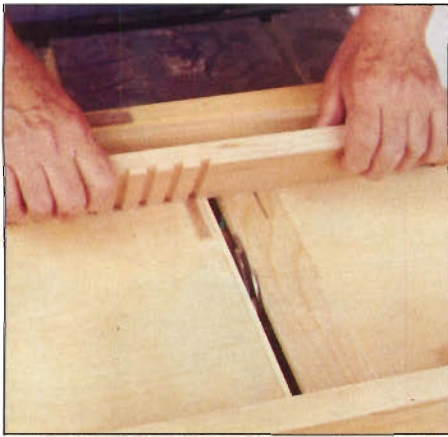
Photo G: Attach key to sliding table to index dentils for second layer. Space $\frac{3}{8}$ "-wide teeth $\frac{3}{8}$ " apart using the indexing key and a dado head on the table saw.
